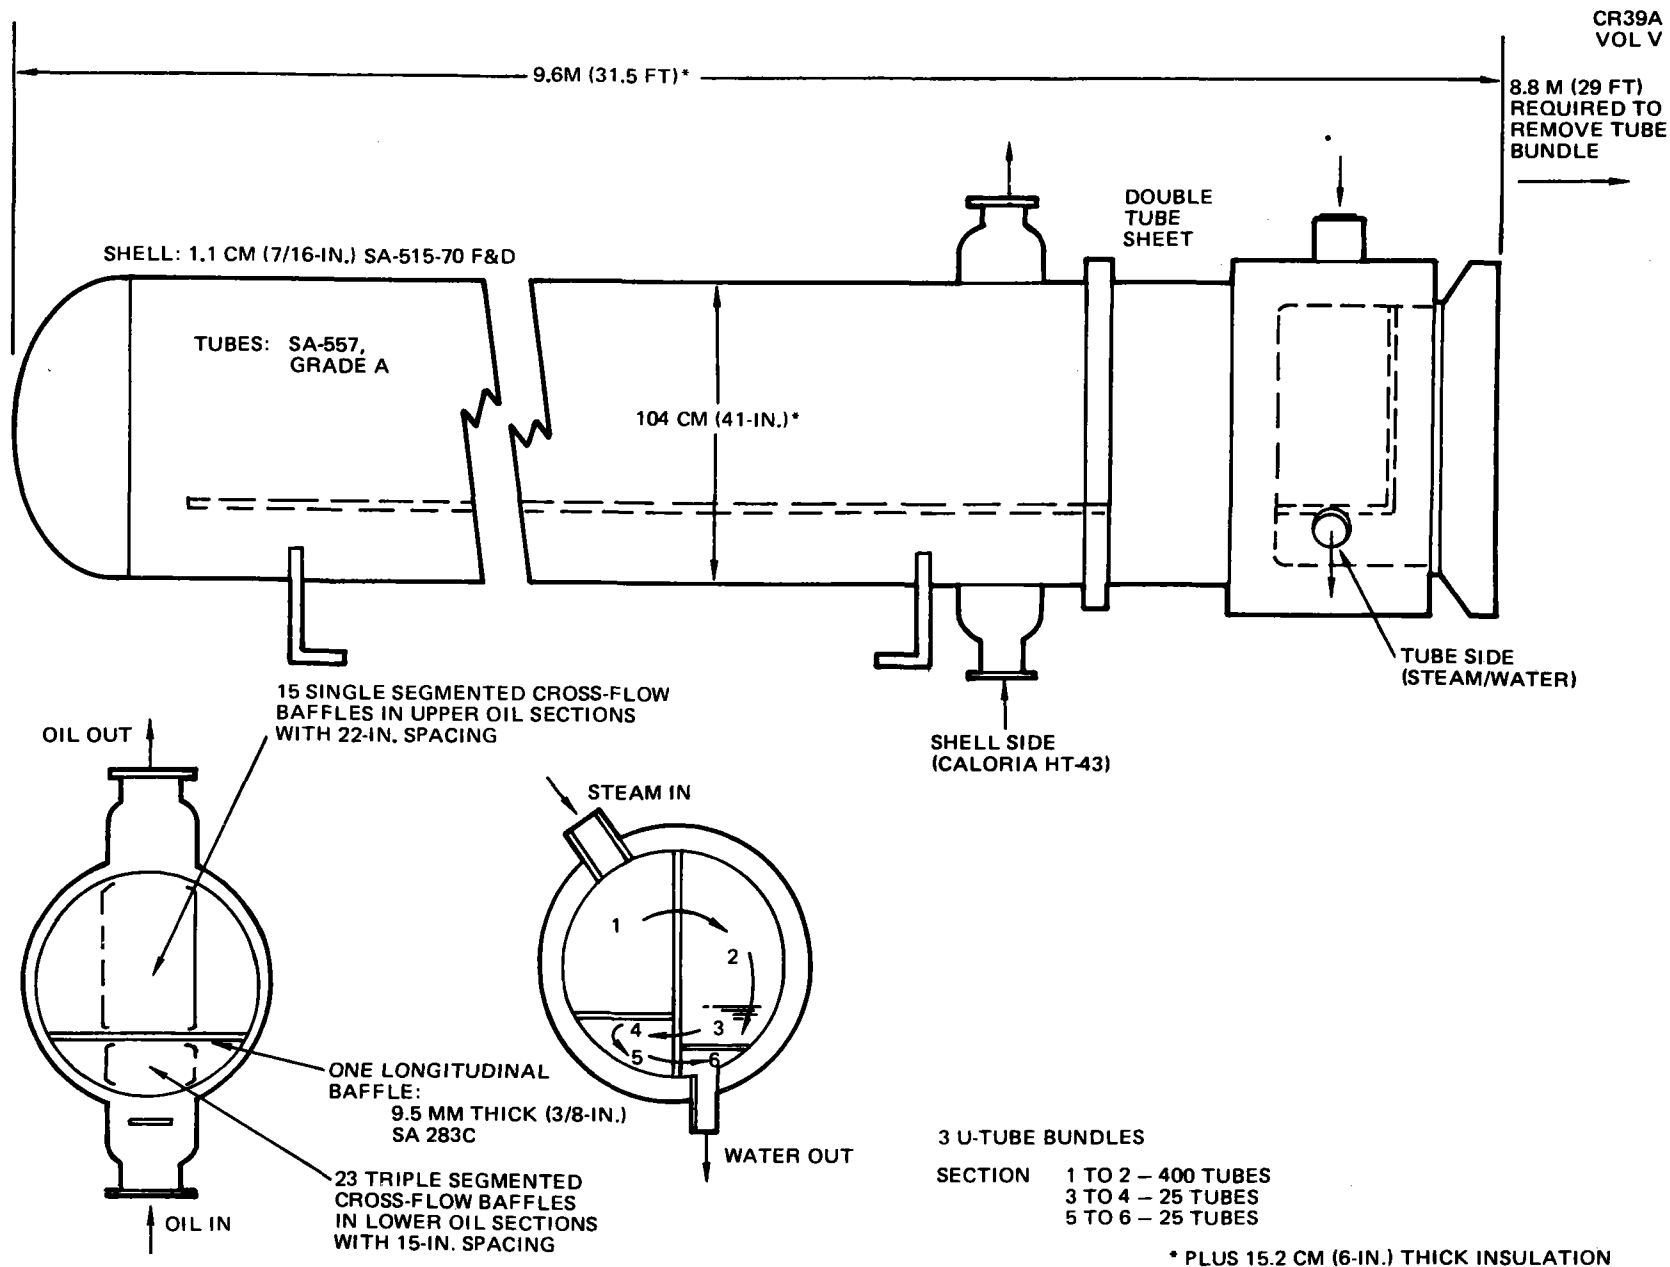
Thermal Storage Heater for 10-MWe Pilot Plant
